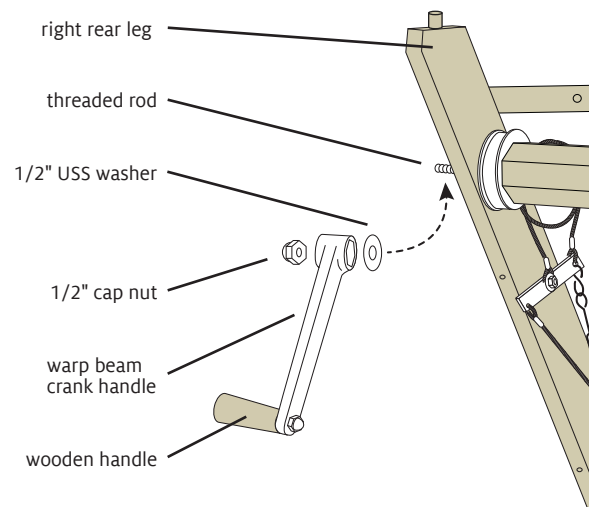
INSTALL THE WARP BEAM CRANK HANDLE
